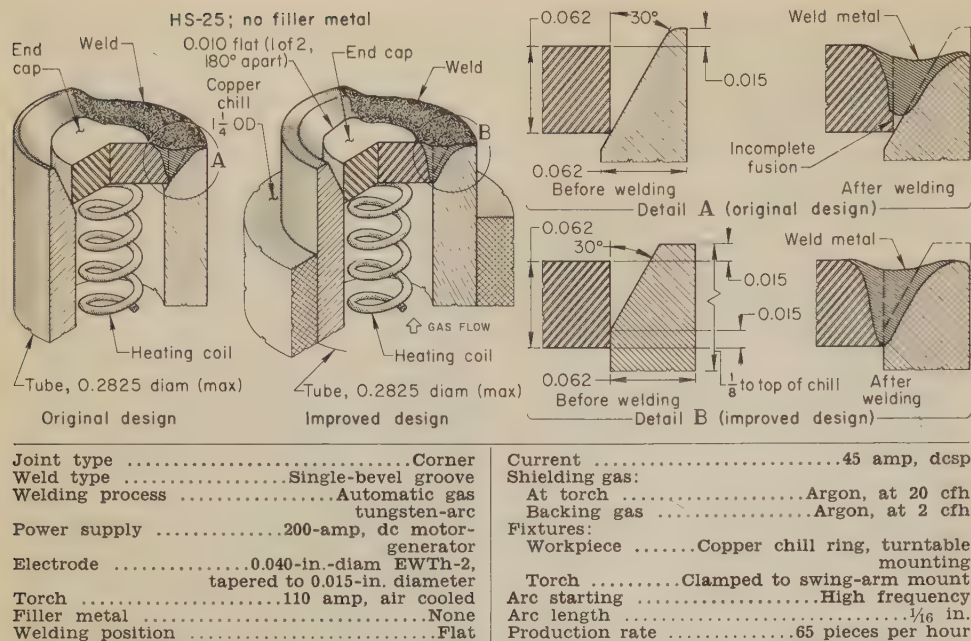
End-closure detail of sheathed heating-element assembly, and original and revised joint design (Example 286)
